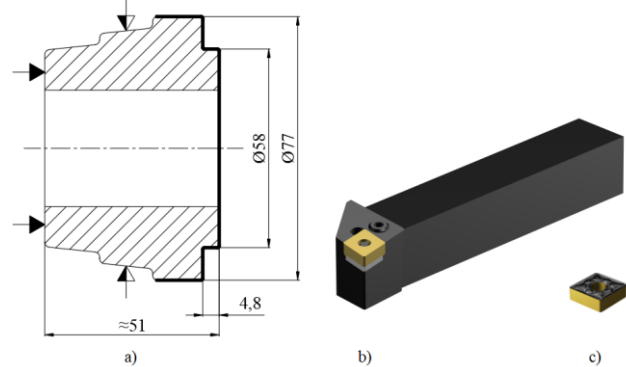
(a) Second pass, (b) Shank tool, and (c) Indexable insert
